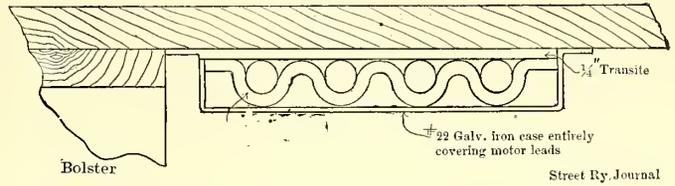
SECTION THROUGH CAR FLOOR, SHOWING METHOD OF CARRYING MOTOR WIRES TO JUNCTION BOX
